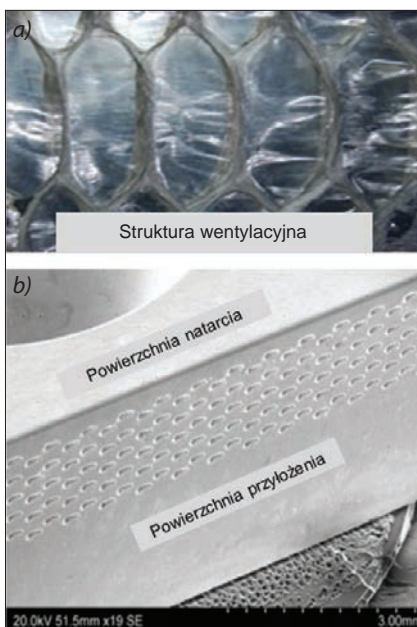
Example of bio-inspired design of textured cutting tools: a) structure of snake scale, b) textured flank face [5, 9]
